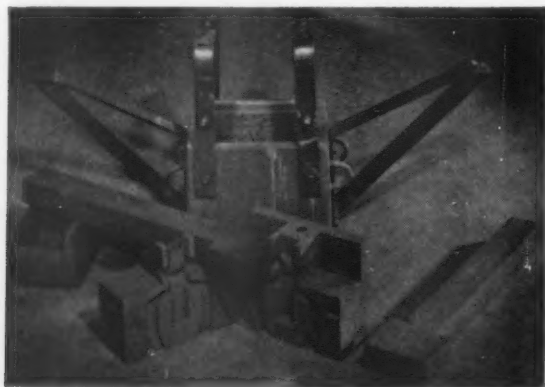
PHOTOGRAPH OF THE UNASSEMBLED MOLD SHOWING THE DRY SAND CORES AND CAST IRON RECEPTACLE.
